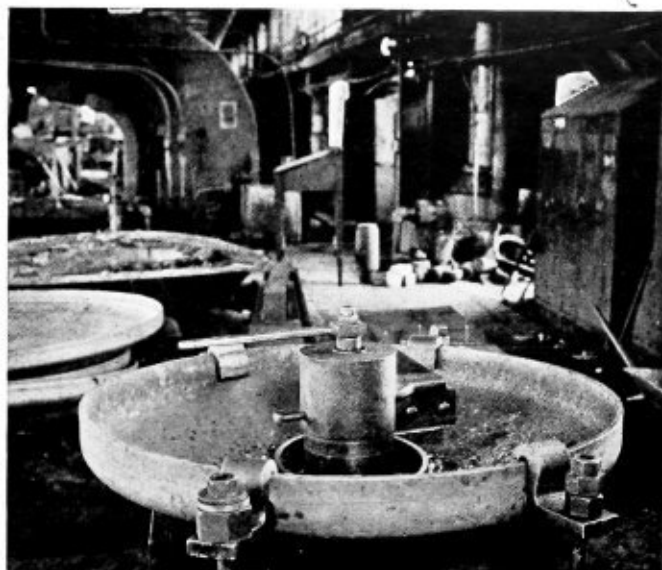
Trimming Machine Used for Truing Up Edges of Manholes, Handholes and the Like
